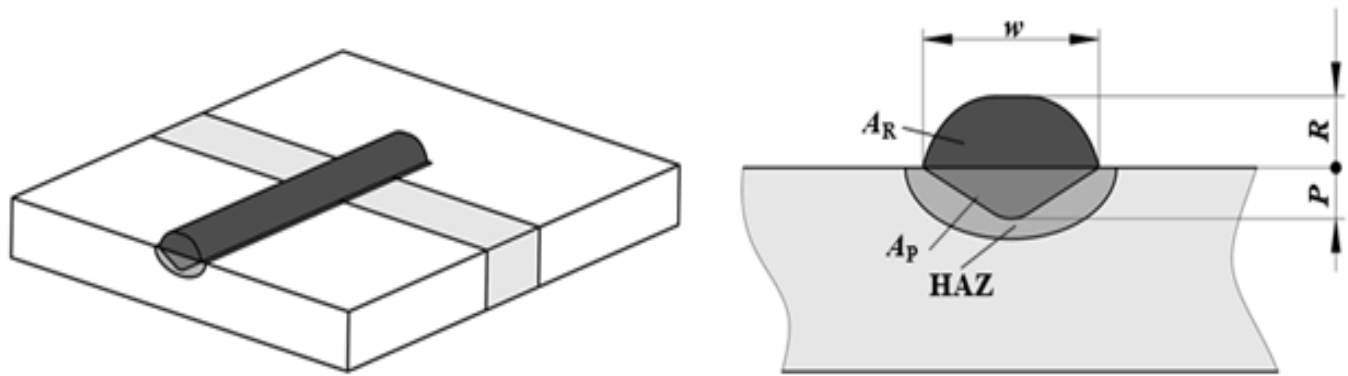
Cross-section of the weld bead (R-Reinforcement; P-Penetration; W-Width).
